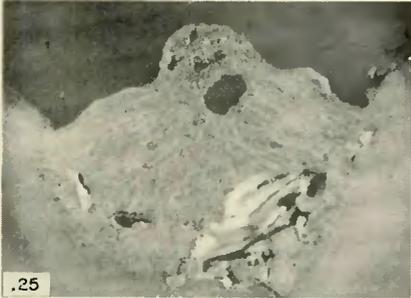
Cross-section of weld made in static air (0.25% Al in weld)
